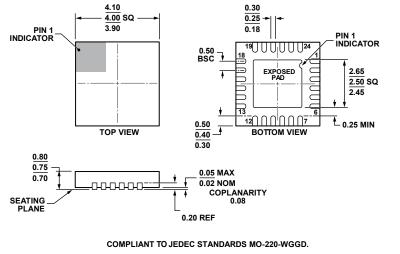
24-Lead Lead Frame Chip Scale Package [LFSCP\_WQ] 4 mm × 4 mm, Very Thin Quad (CP-24-7) Dimensions shown in millimeters
